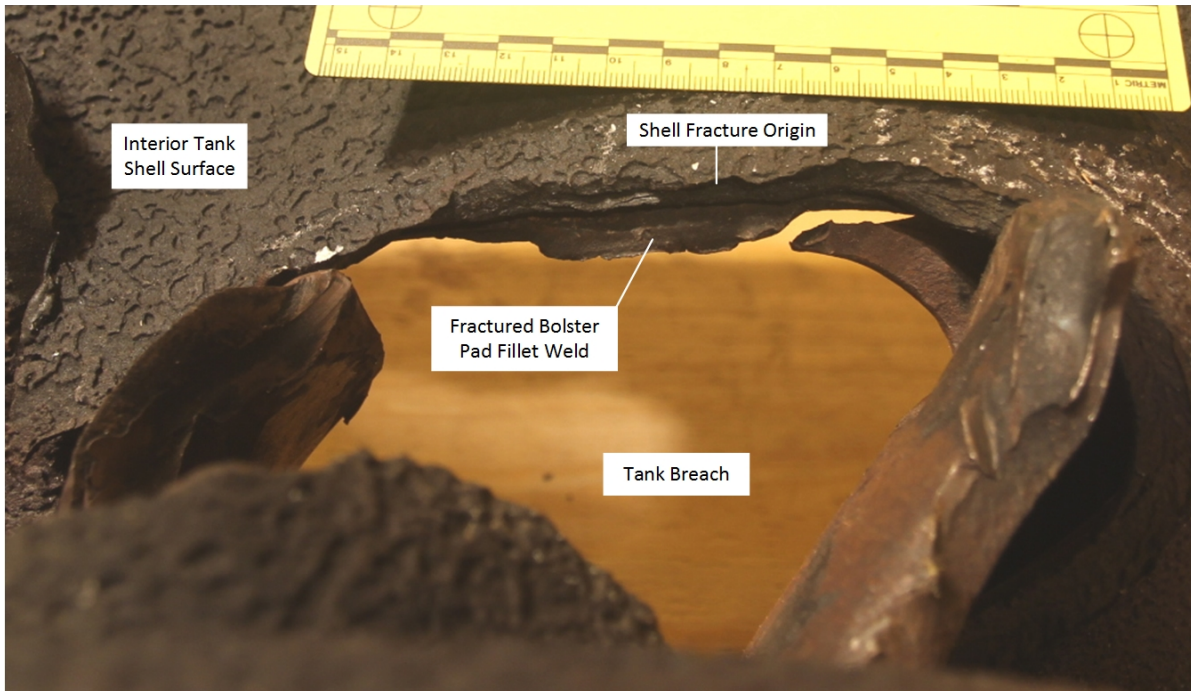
UTLX 209403 shell plate coupon showing the tank breach created by fractured shell material. The origin of the shell fracture is indicated adjacent to fractured bolster pad fillet weld material.
